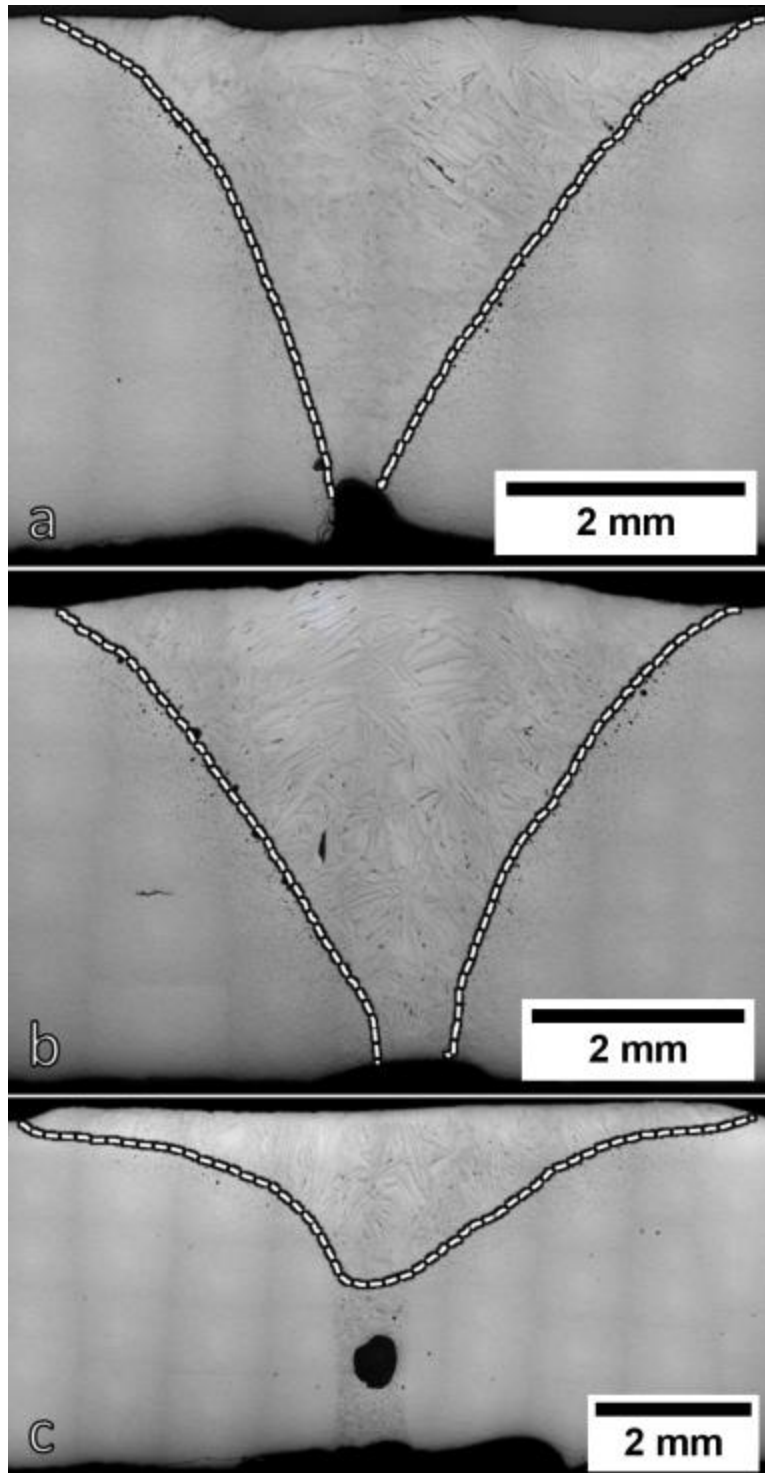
Three weldment cross-sections, cut perpendicular to the welding direction, with the FZ outlined. Weldment 02 (a) and weldment 11 (b) were considered full penetration keyhole welds, due to their cone-like appearance. Weldment 20 (c) was not considered to be a key hole weld.
